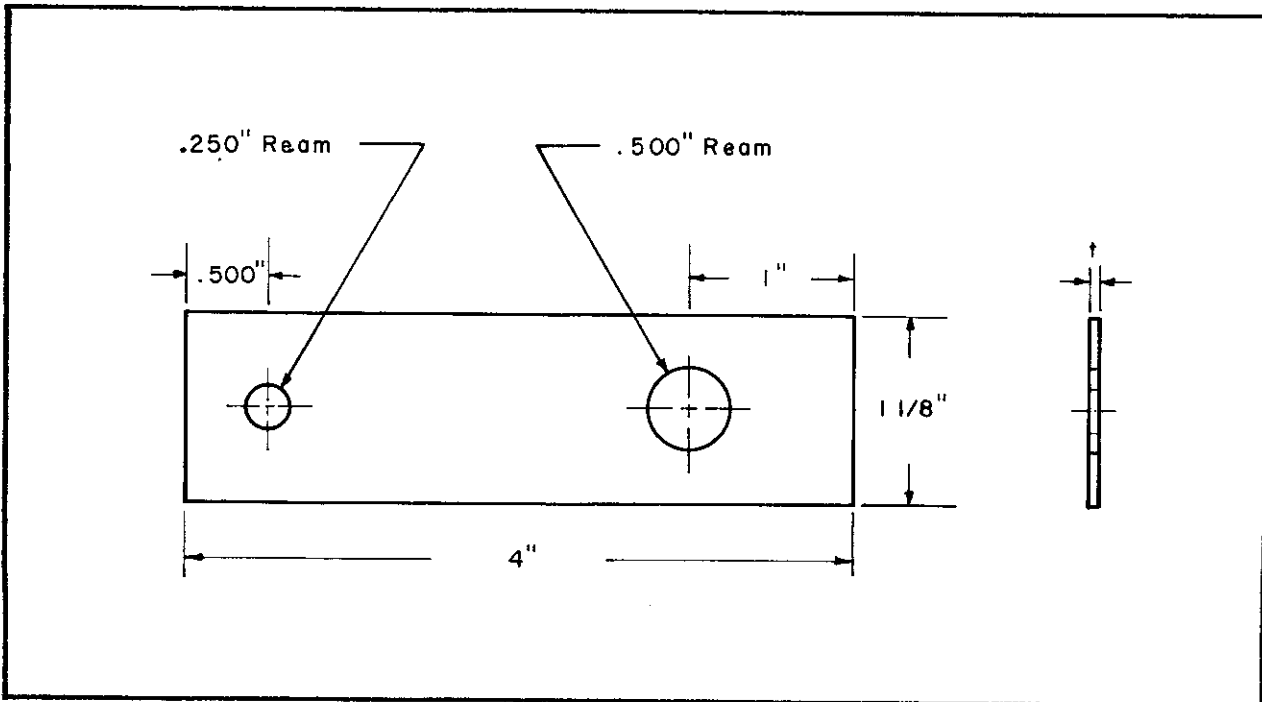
Sheet Bearing Test Specimen, Bearing Ratio $e/D = 2.0$
